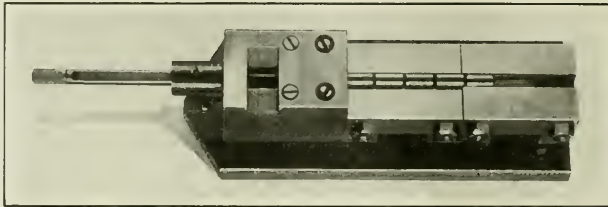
Gage built up of Plates, which checks the Length and Diameter of Clutch Rolls
